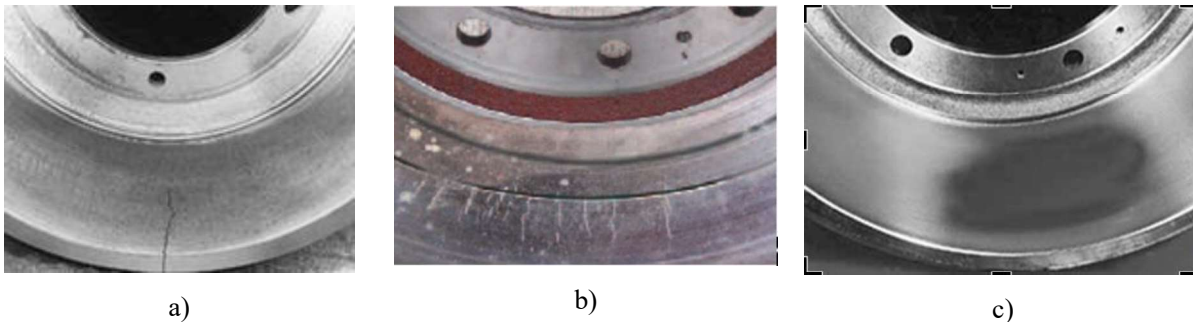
a) Cracked drum, b) Heat-checking, c) Oiling/greasing of friction surfaces
